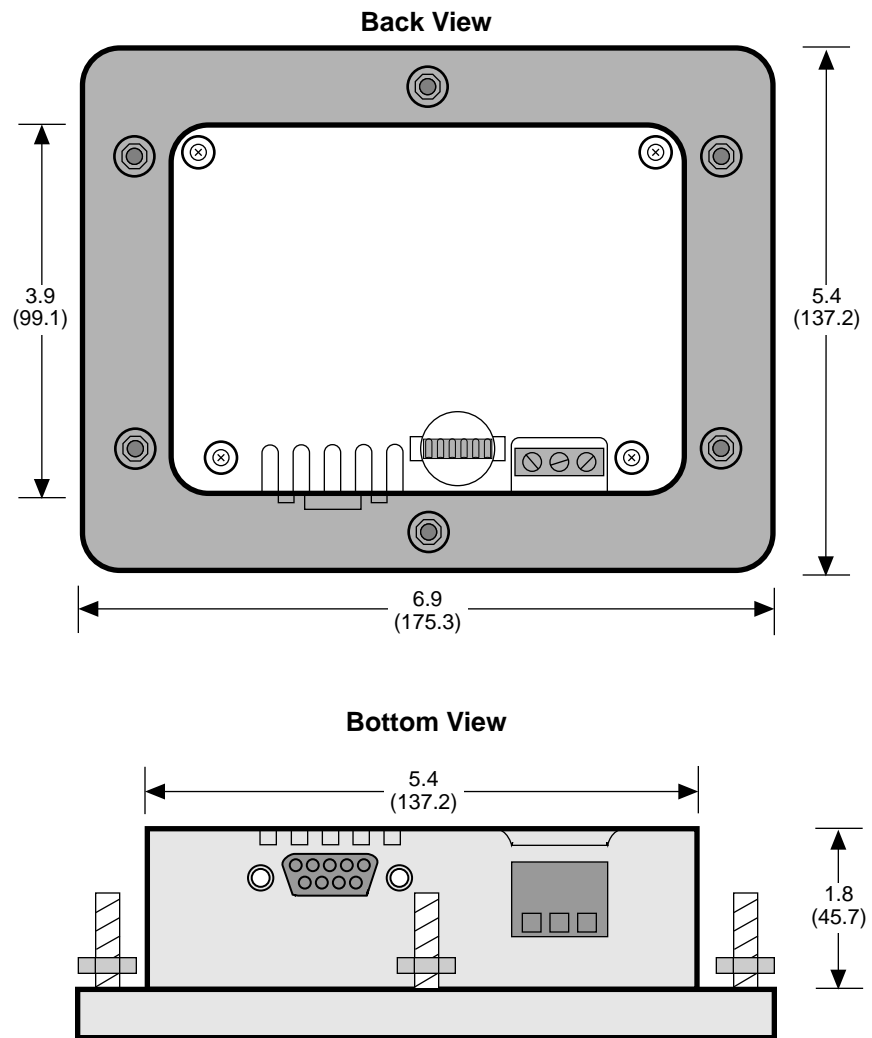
Mounting Dimensions in Inches (Millimeters)
